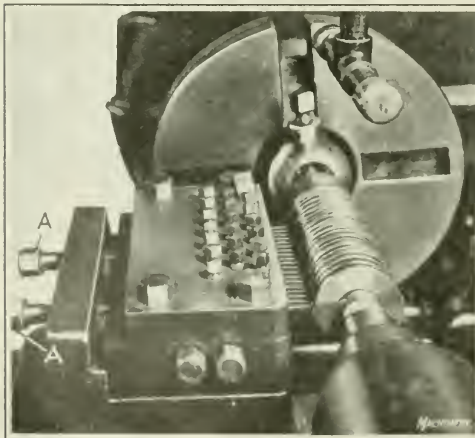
Lathe with Multiple Tool-block, set up for cutting Bronze Washers from a Casting
